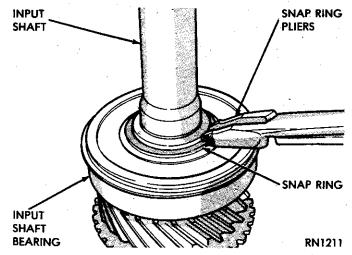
Removing/Installing Front Bearing Retaining Snap Ring
